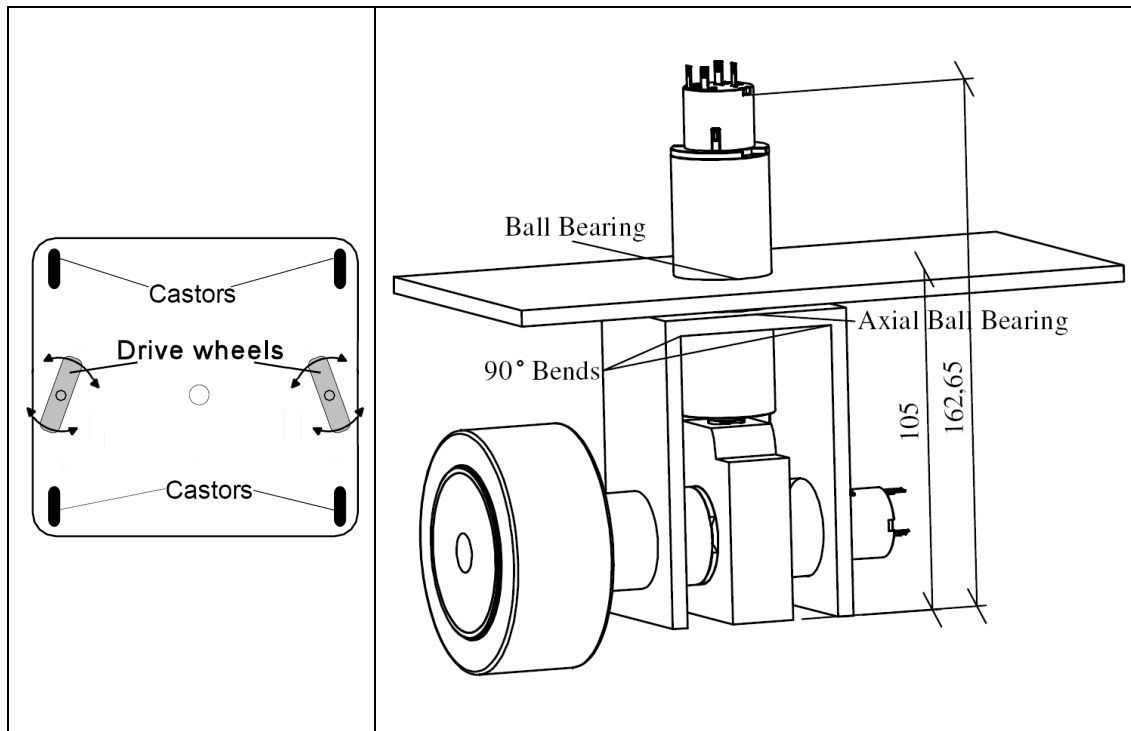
Classical 4-DOF Device and a Simple Mechanism to Drive Wheels
